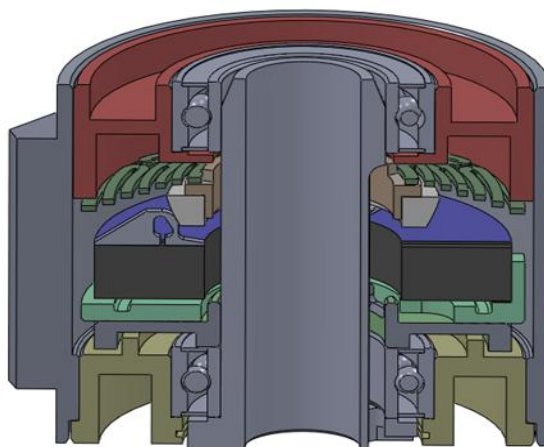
Flat Pull spring design TRUM HDD actuator
